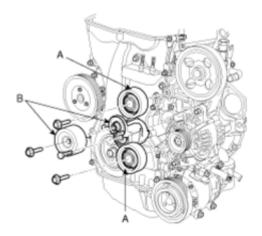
Identifying Engine Mounting Bracket Courtesy of KIA MOTORS AMERICA, INC.
